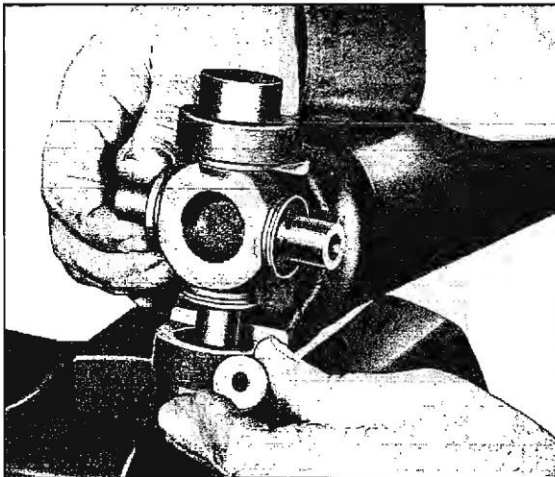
A-7 Placing Washers Inside Bearing of Fixed Yoke Member
